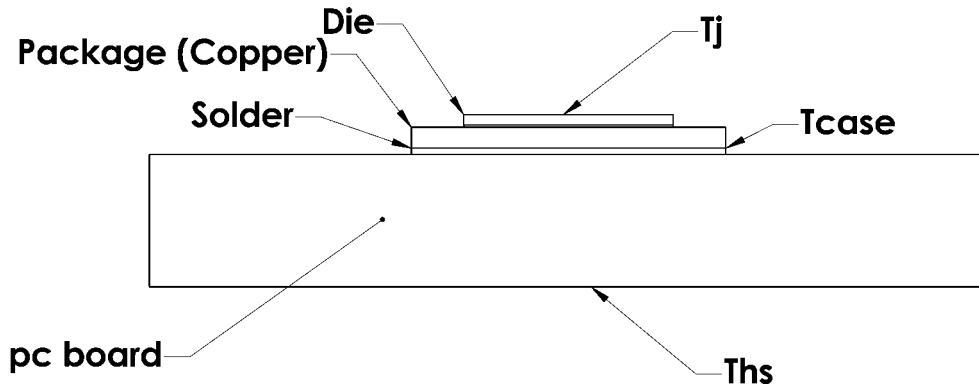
Cross Section of a Typical Component Mounted onto a pc Board
